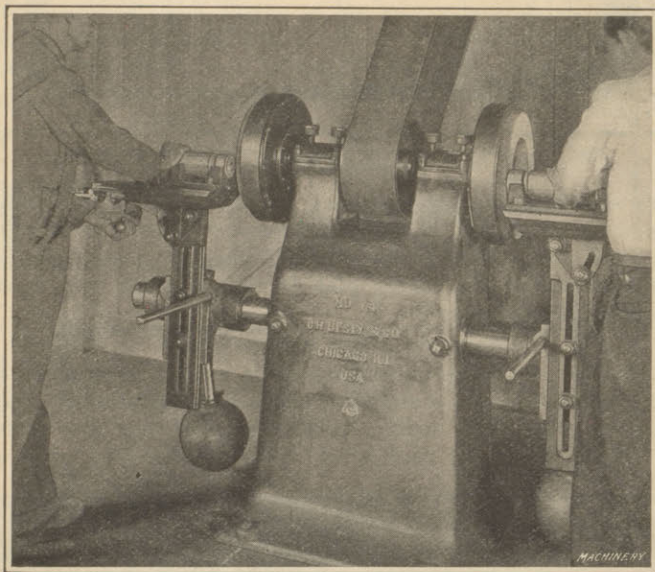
Besly No. 14 Ring Wheel Grinder equipped for grinding Shrapnel, but shown without Hoods and Water Attachments
